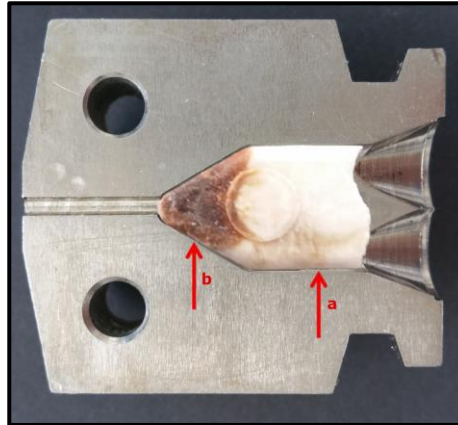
Cross section view of standard 2 mm die with extracted extrusion sample positioned inside; a) undegraded material right after barrel exit, b) origin of deteriorated product at steep narrowing within die.
